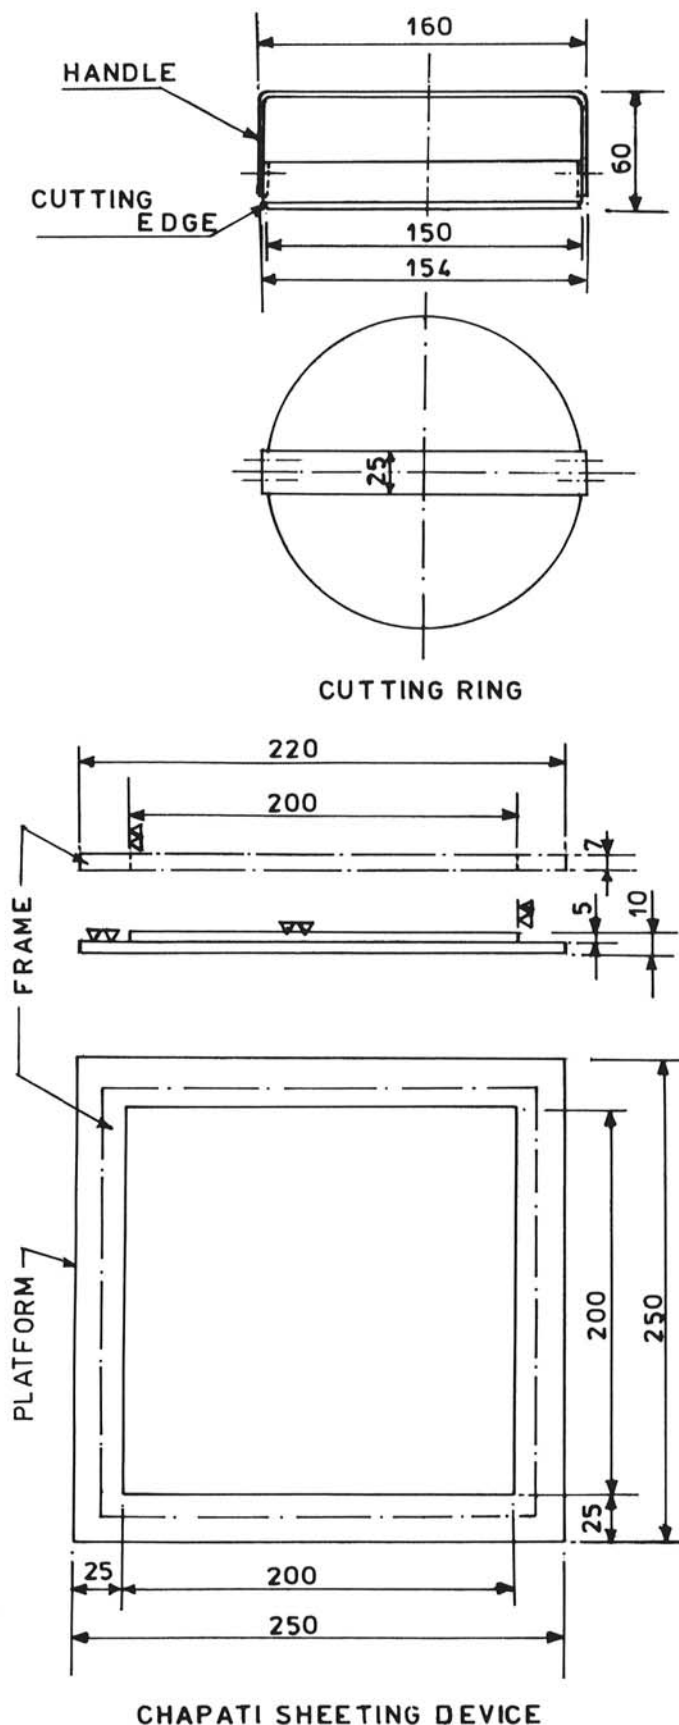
Details of various devices used for sheeting chapati to uniform thickness (dimensions are in millimeters).
